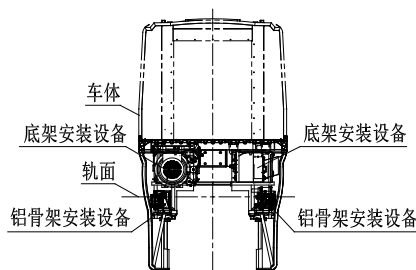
Schematic cross-section of the equipment under the straddle monorail
